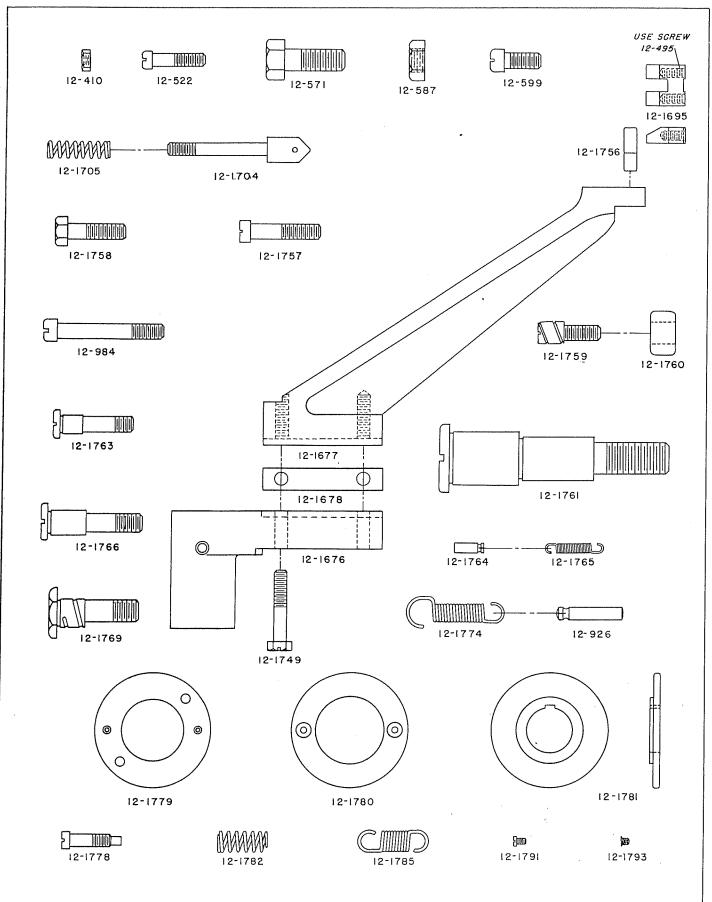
Automatic Cut-Off Parts (approximately ½ size)
